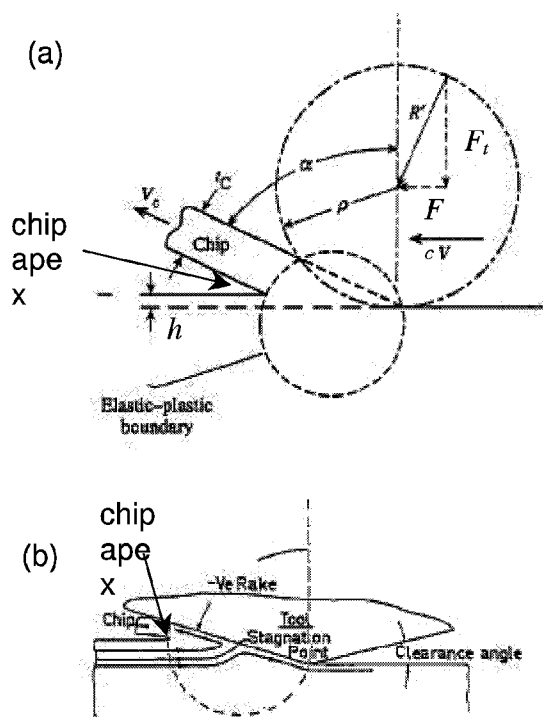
(a) Shaw's grinding mechanism employing ductile extrusion ahead of the grit [8, 9]. (b) Komanduri's model for grinding similar to machining with a high negative rake angle [3, 4].
